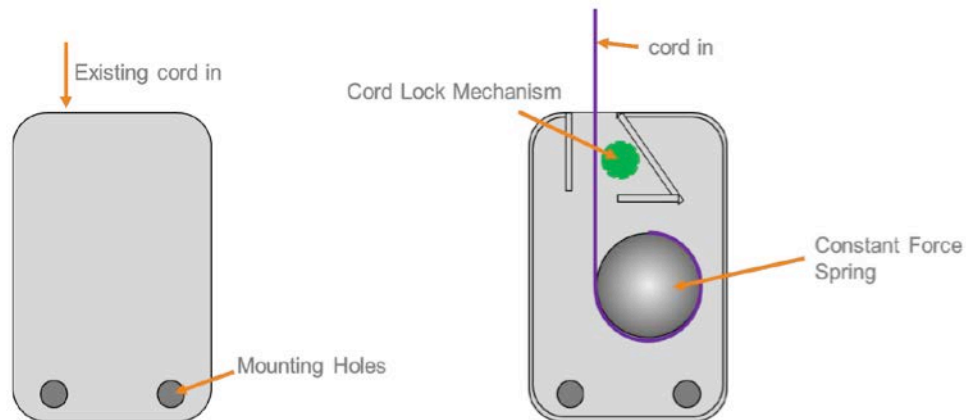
Mechanism 2 Design Pull Mounted Cord Reeling Accessory
